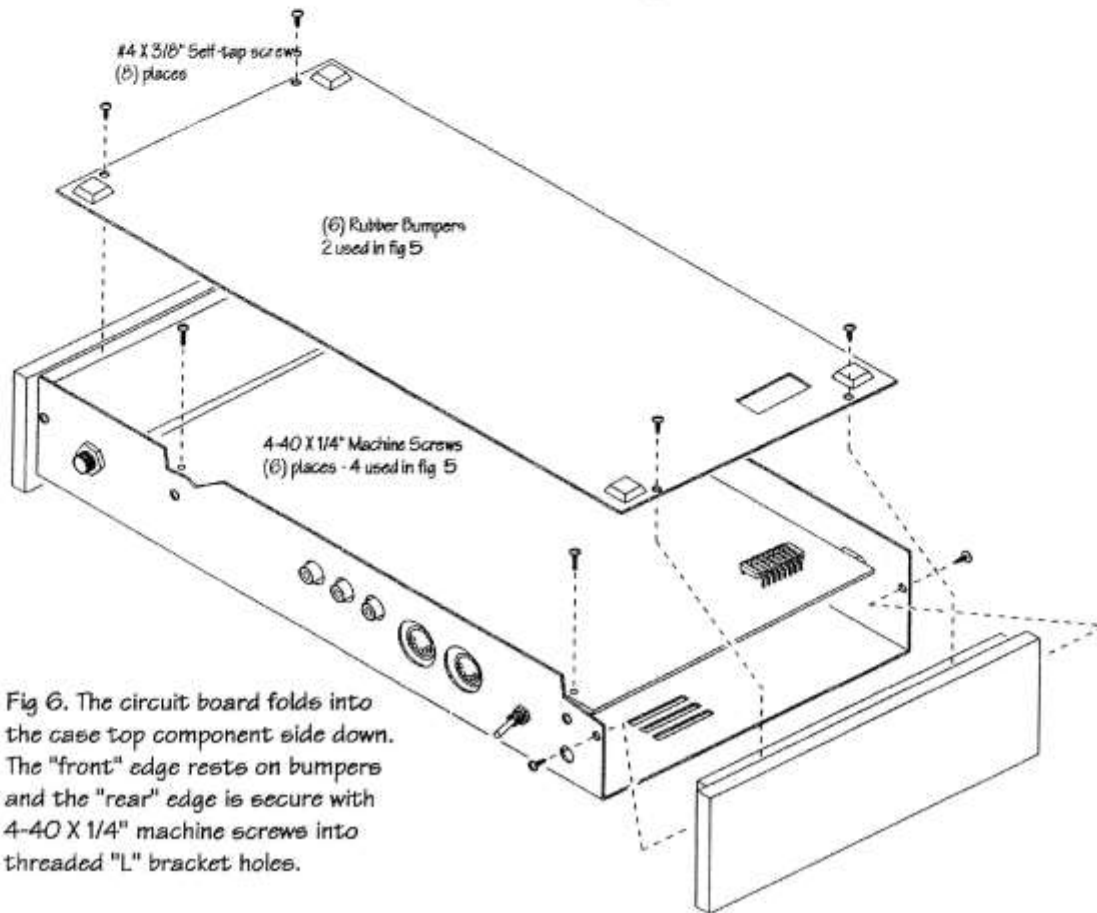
The circuit board folds into the case top component side down. The "front" edge rests on bumpers and the "rear" edge is secure with 4-40 X 1/4" machine screws into threaded "L" bracket holes.
